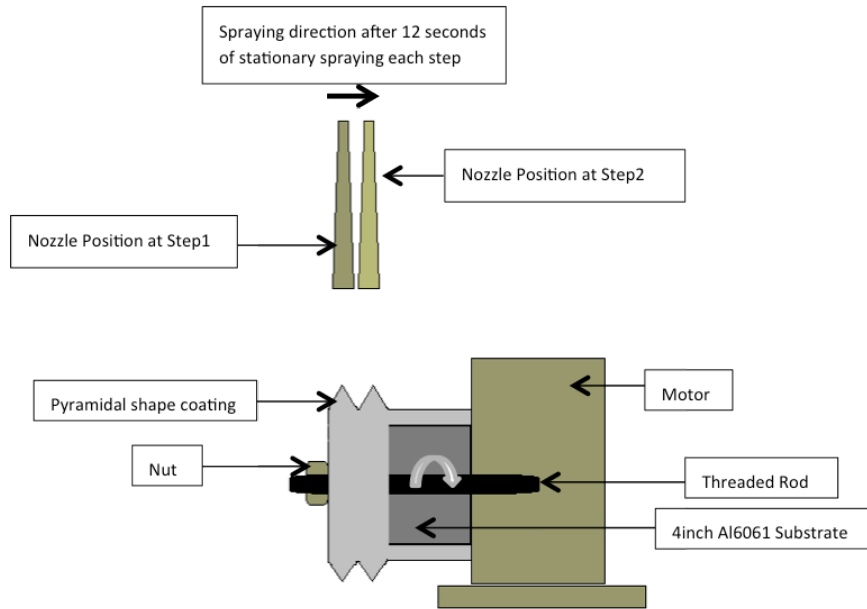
Step set-up for the repair of the 88.9 mm diameter Al6061-T6 bars.
